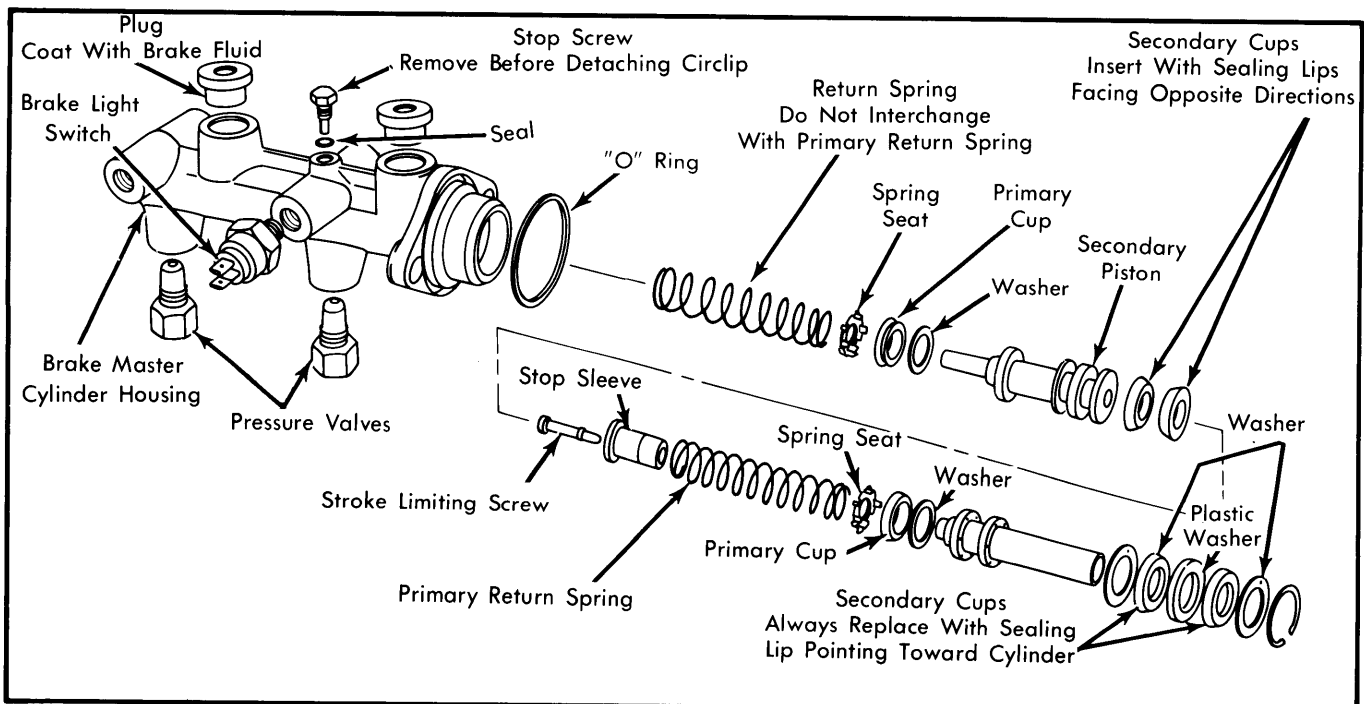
Master Cylinder Component Relationship (Audi 4000 Housing External Design Differs – Internal Parts Are Identical)
